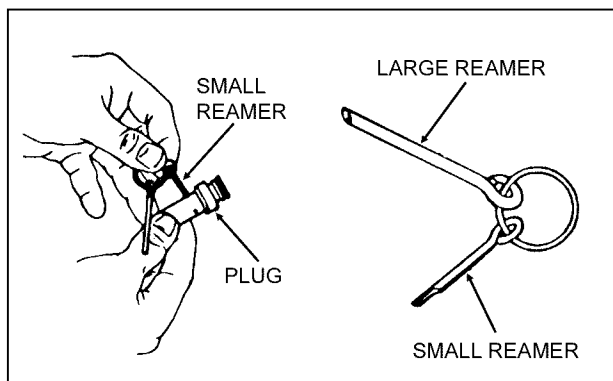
Tools for cleaning the gas regulator plug inlet holes.
